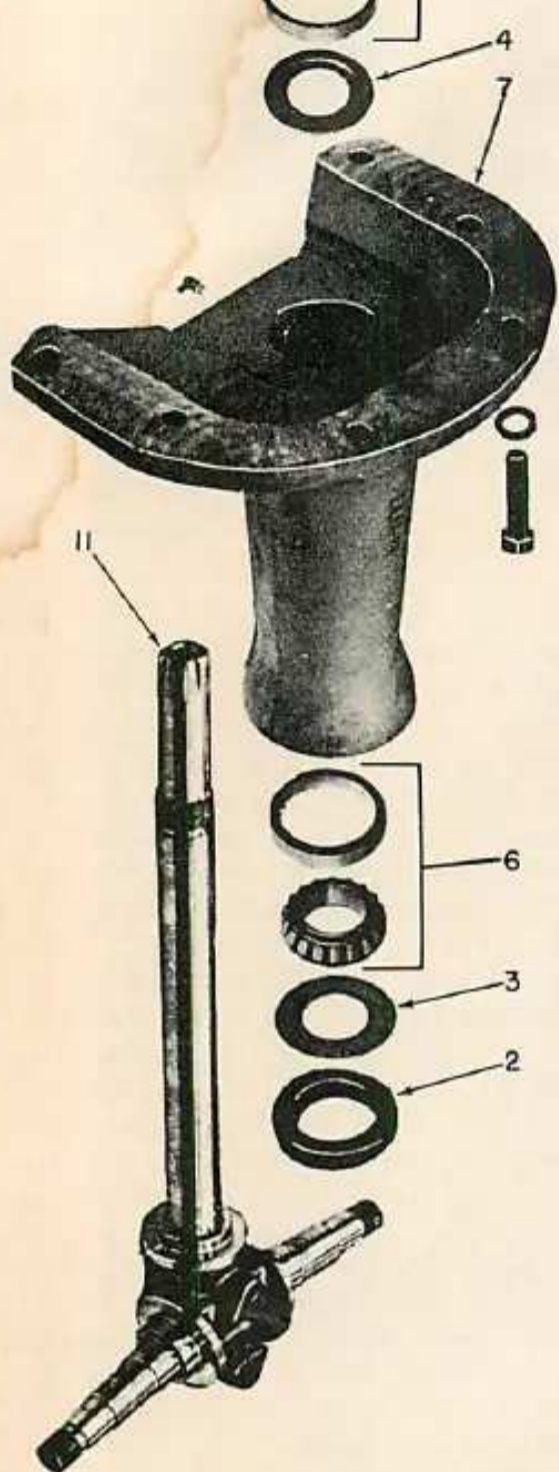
Exploded view of front support (column), axle post and bearings unit used on dual wheel tricycle models with power steering. Refer to Fig. O8 for manual steering models.
